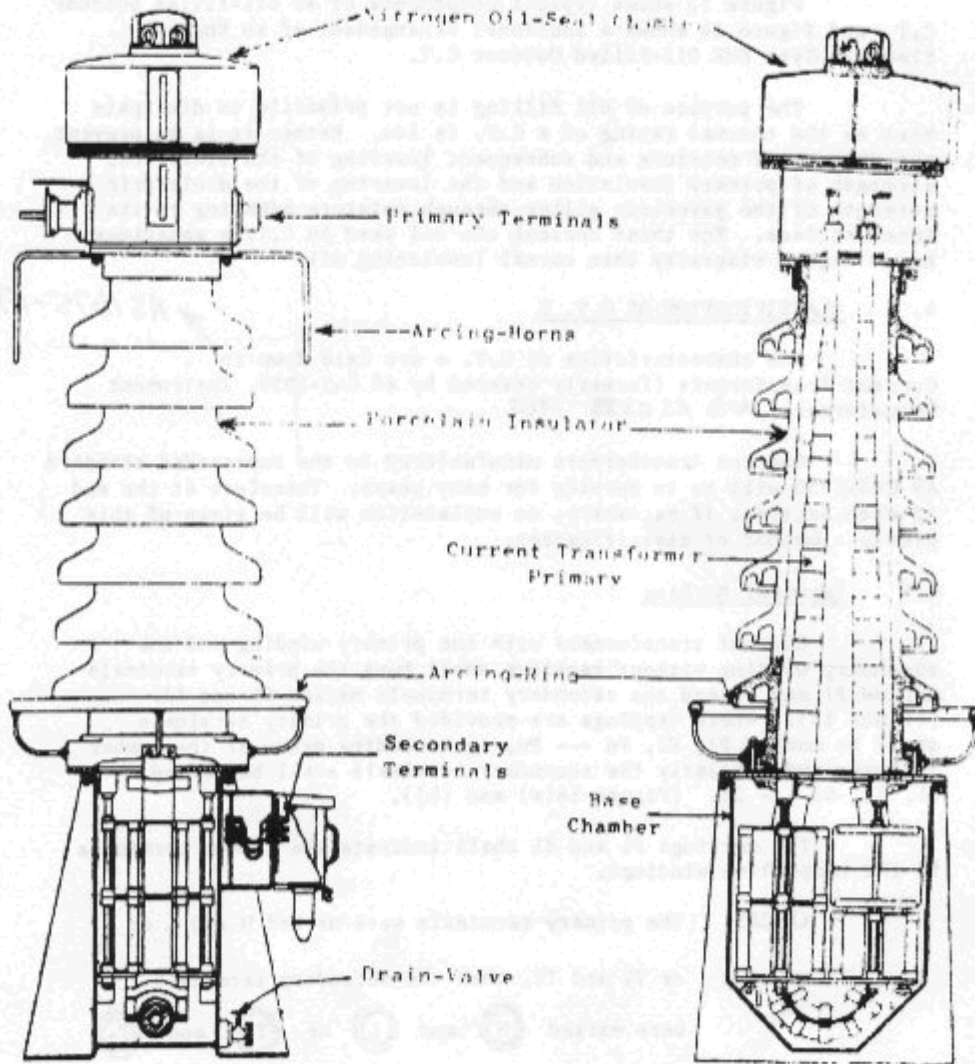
Typical Components of Oil-Filled Outdoor C.T. (Geyrolle)
